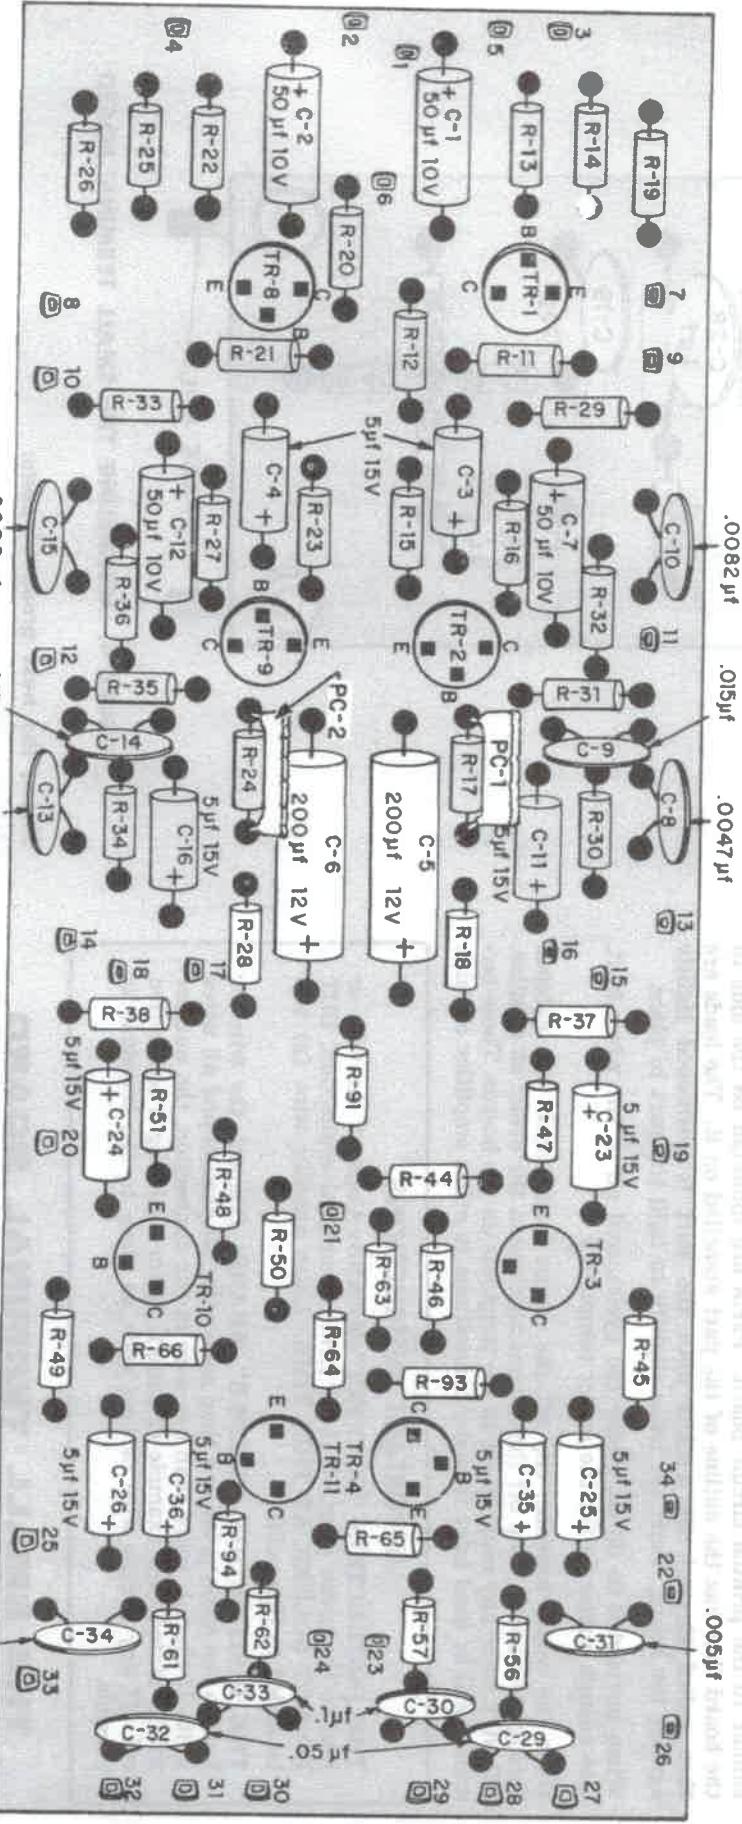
MOUNTING PARTS ON THE PRINTED CIRCUIT BOARD
